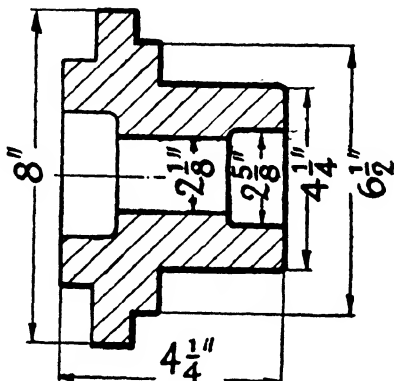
CAST IRON COMPONENT MACHINED WITH CARBIDE-TIPPED TOOLS
